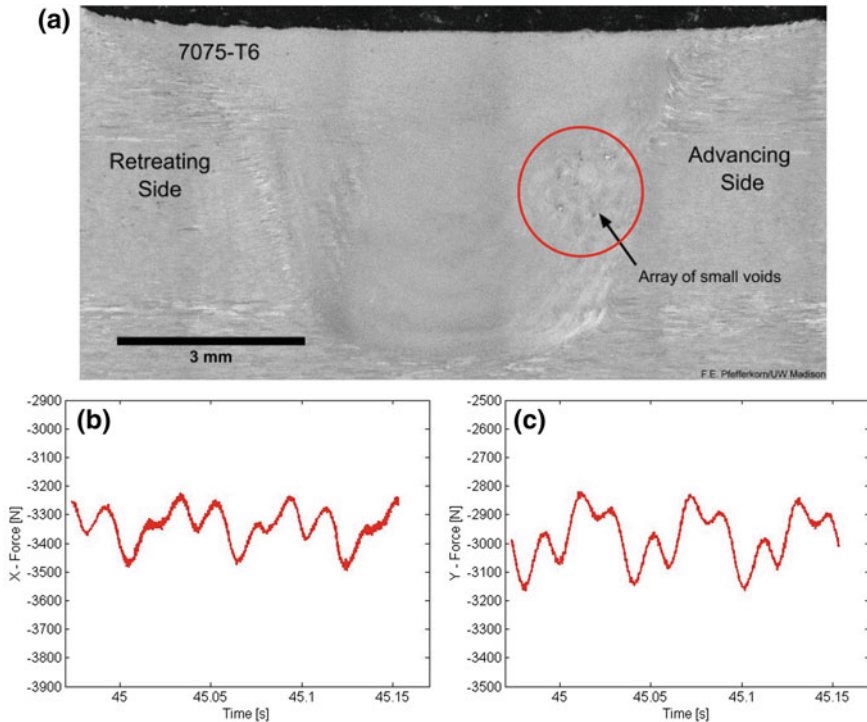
Results of weld at 1,000 rpm and 600 mm/min in alloy 7075-T6: a cross section of weld, b force signal perpendicular to welding direction, c force signal in direction of welding
